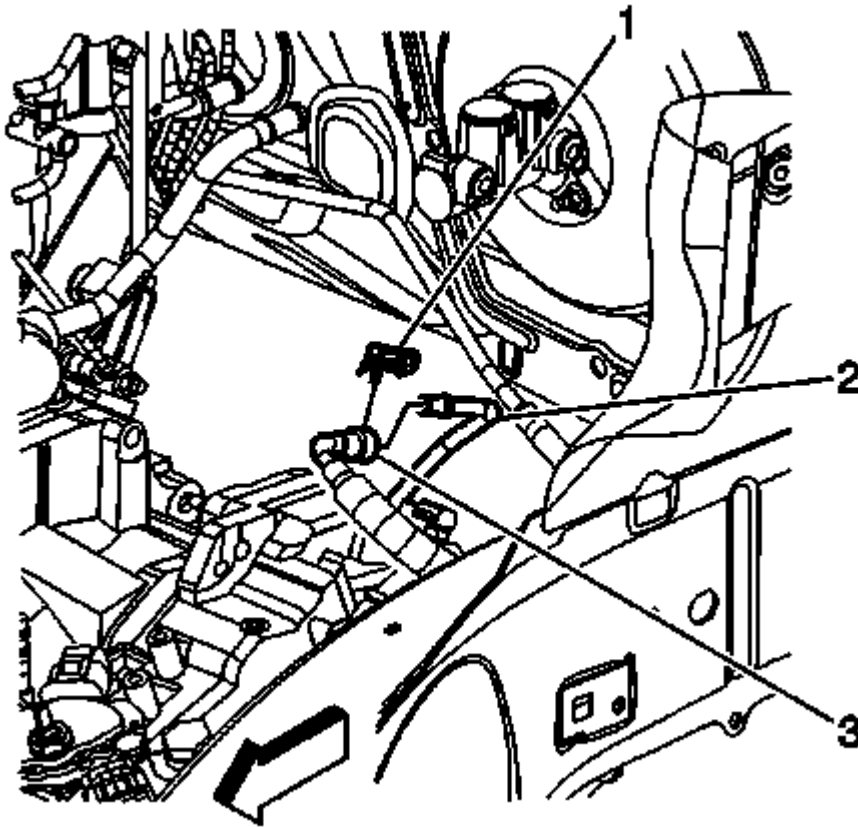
Identifying Engine Fuel Hose/Pipe At Chassis Fuel Hose/Pipe
